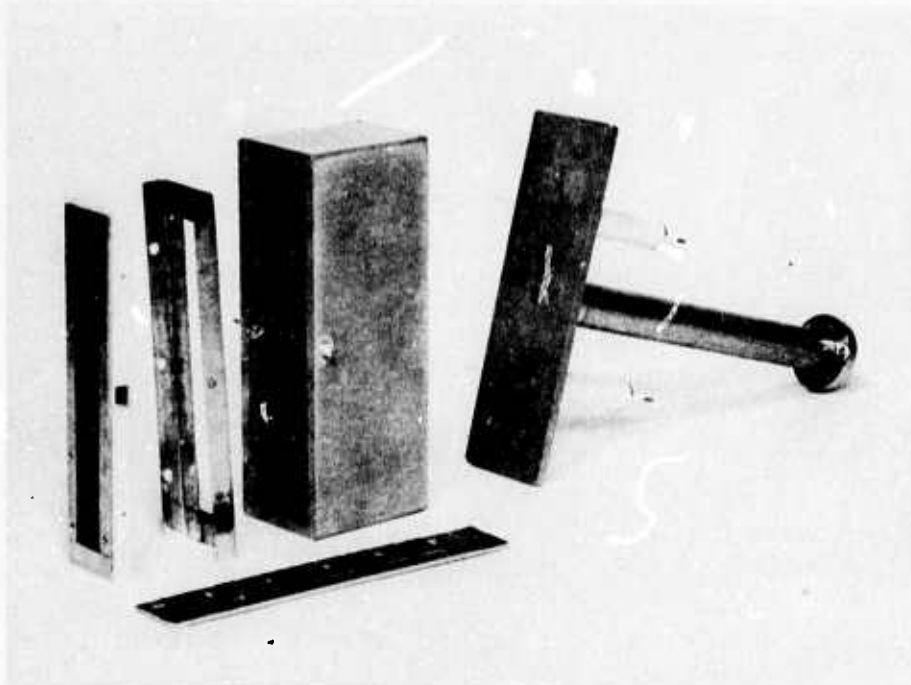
Exploded view of the discharge chamber and grid assembly.
